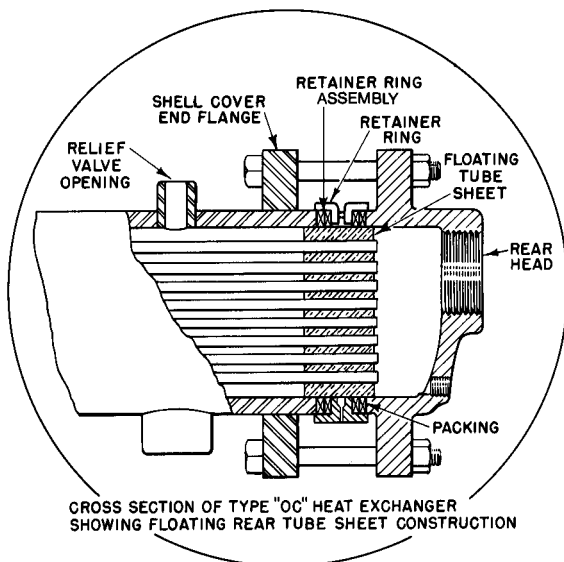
Illustration No. 3 – Cross section of type "OC" Heat Exchanger showing rear tube sheet construction. (See packing retainer detail)
